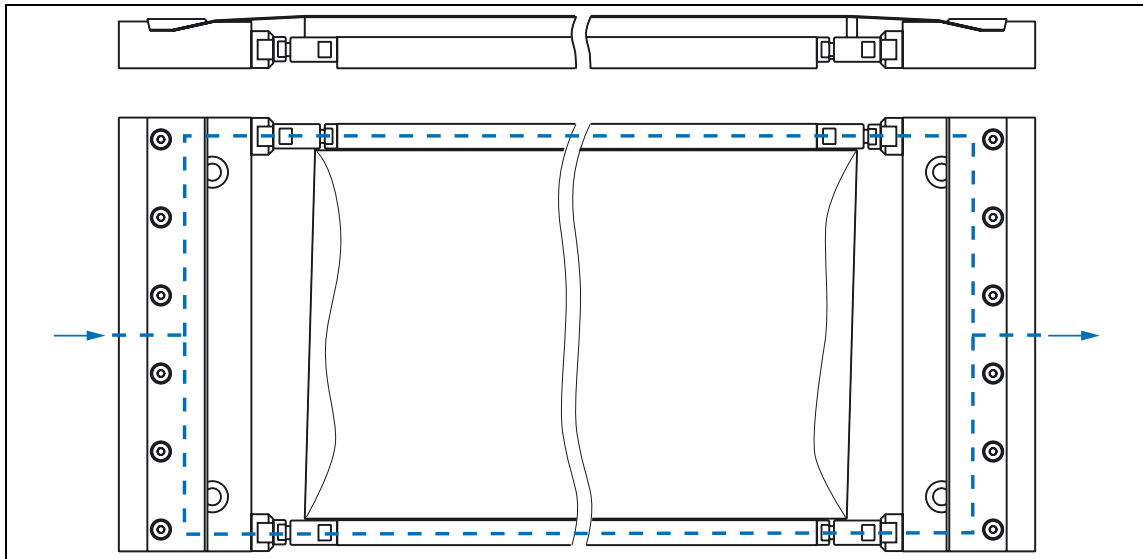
Secondary section cooling for 1FN3050...1FN3450-type motors with combi distributors (side and top view)
